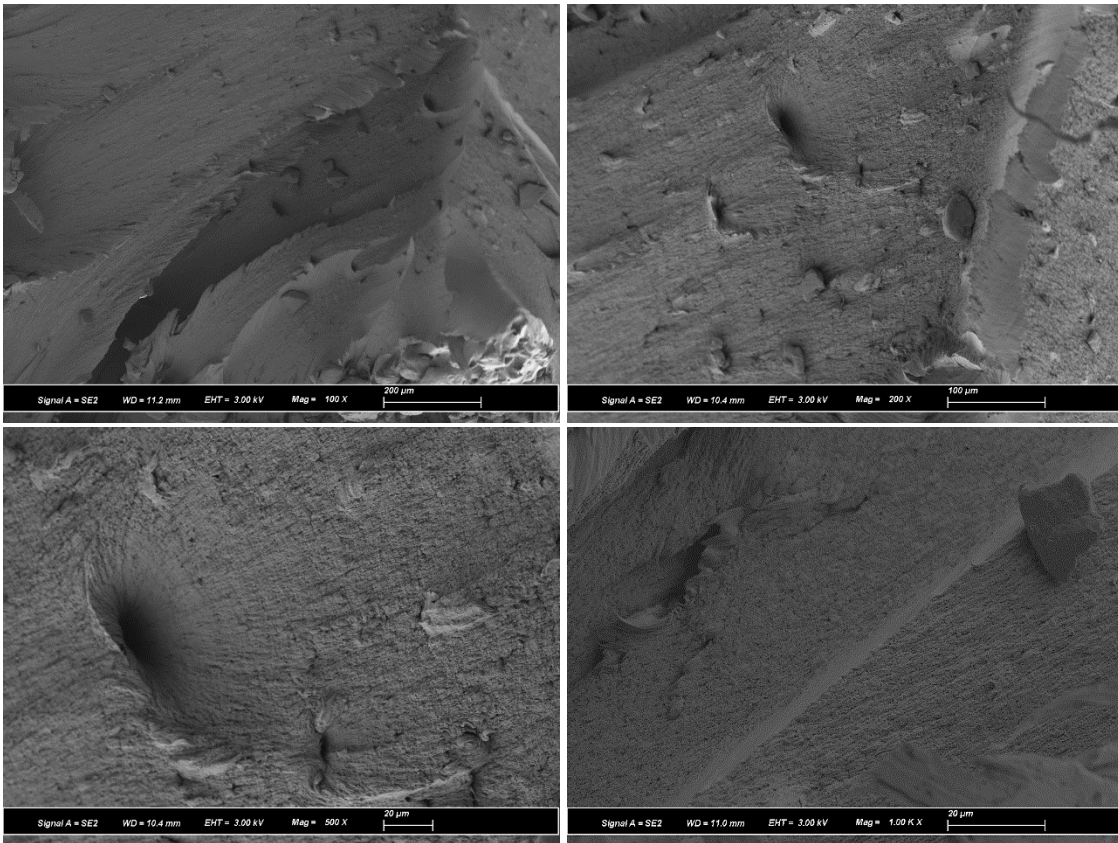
Selected tensile fracture surface images of A_{N10} printed samples.
